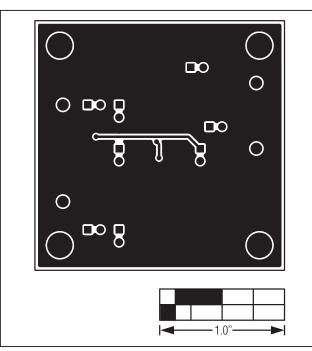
MAX4231 EV Kit PCB Layout—Solder Side
